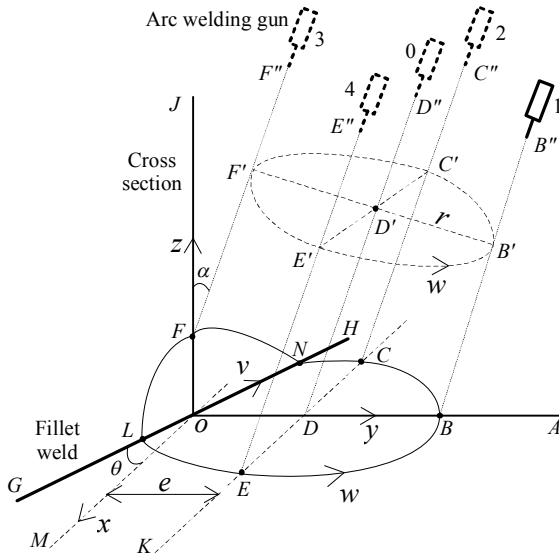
The arc welding gun deviates from fillet weld to the right and tilts forward
